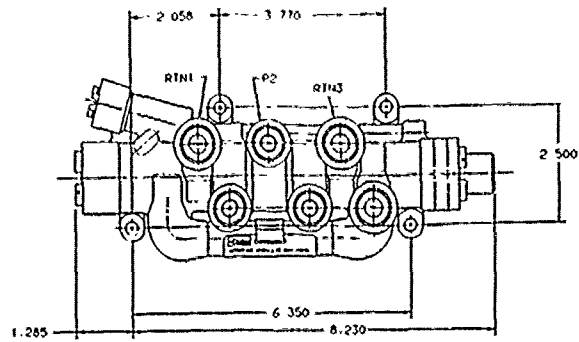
Parker - Switching Valve (6W-2P) Outline Drawing
